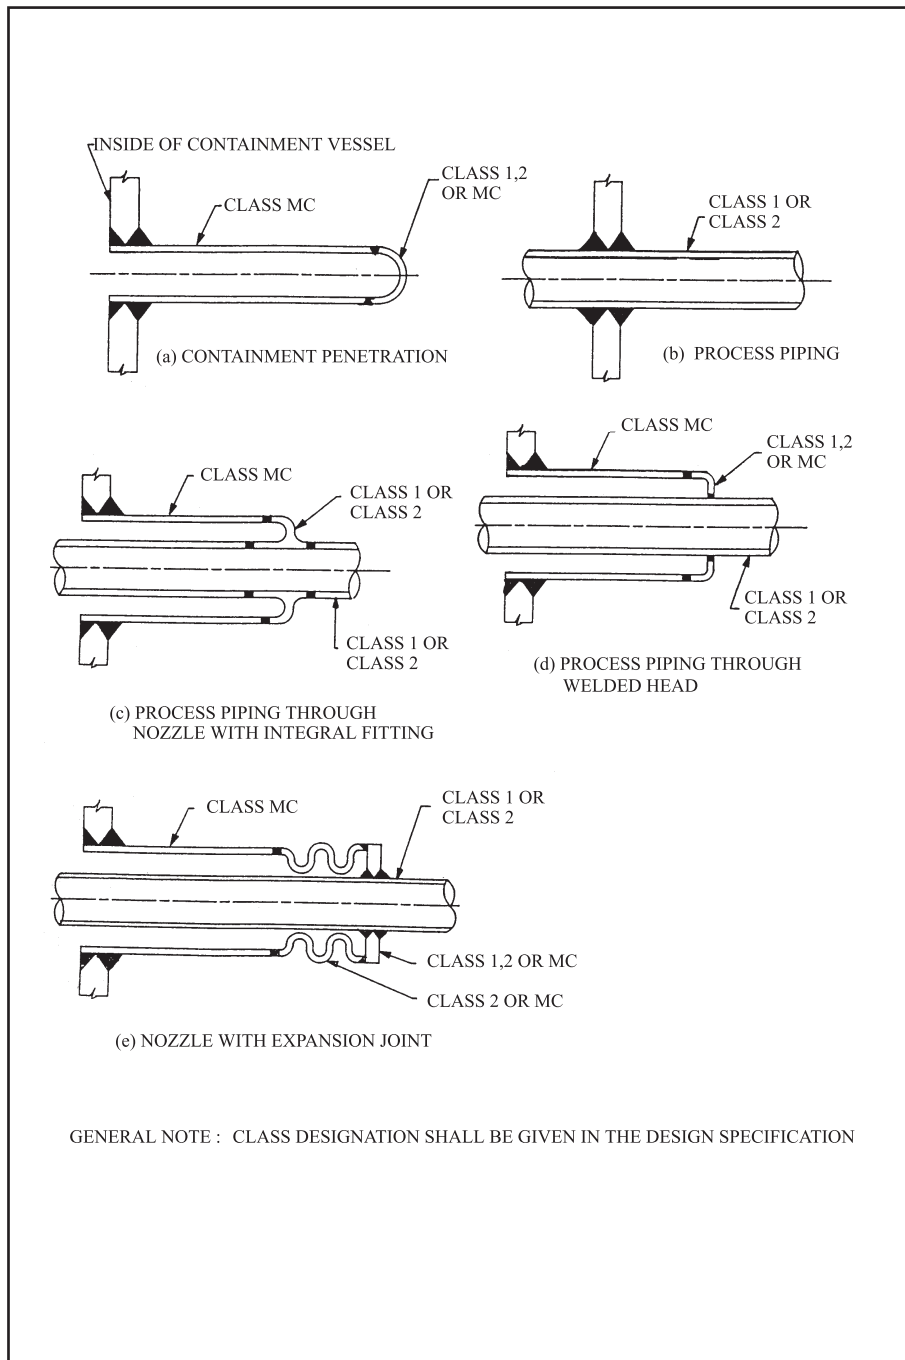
TYPICAL METAL CONTAINMENT PENETRATIONS
